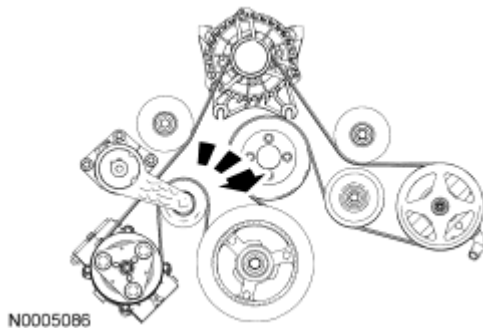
Rotating Accessory Drive Belt Tensioner Clockwise
